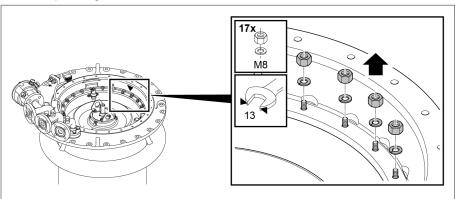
Nuts and locking elements joining the top part and bottom part of the on-load tap-changer head
